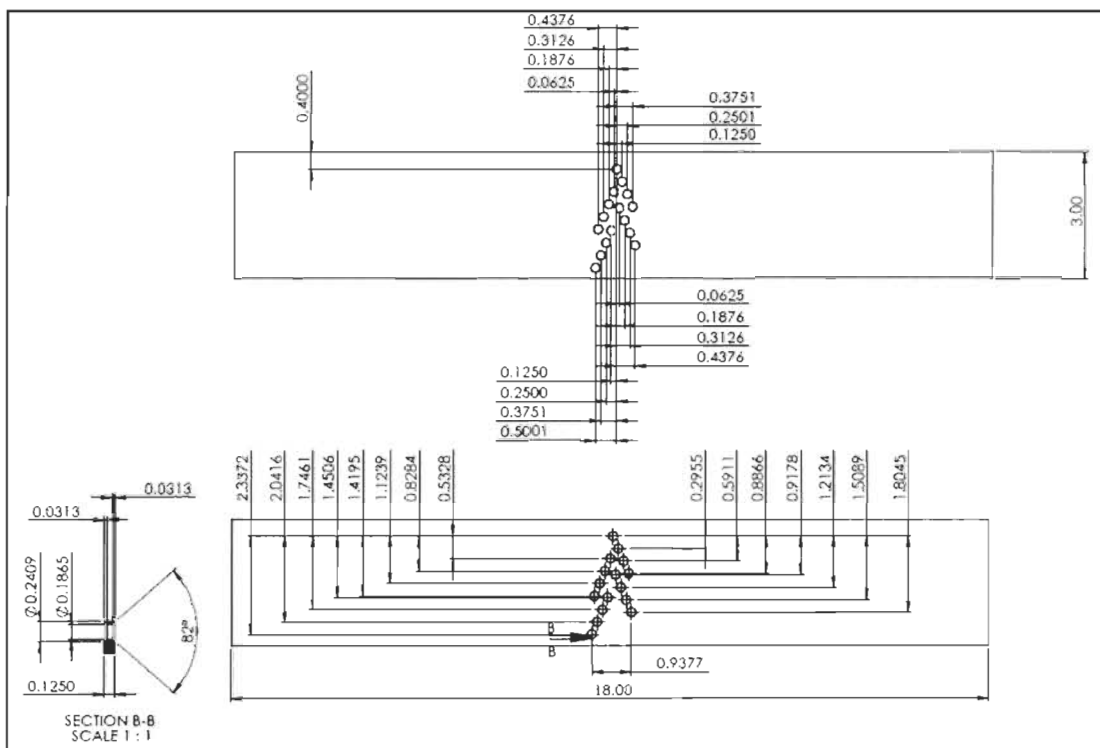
Technical drawing for the comb of Figure 3-13b, dimensions are in inches.
